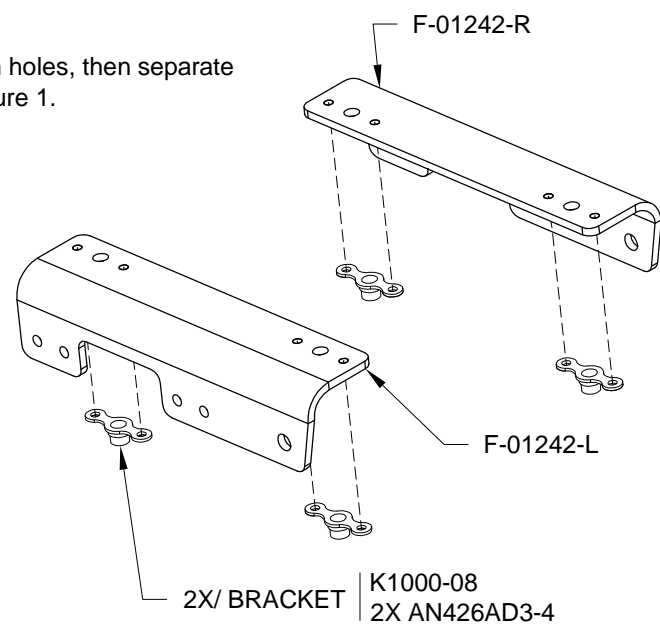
RIVETING NUTPLATES TO F-01242-L & -R
